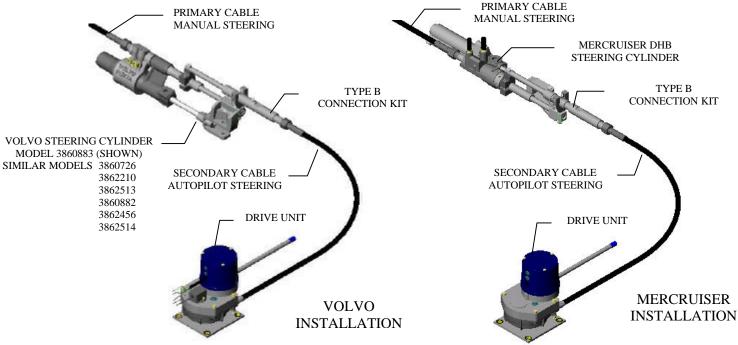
DETAILED INSTALLATION PROCEDURE TYPE B – MULTI I/O CONNECTION KIT
